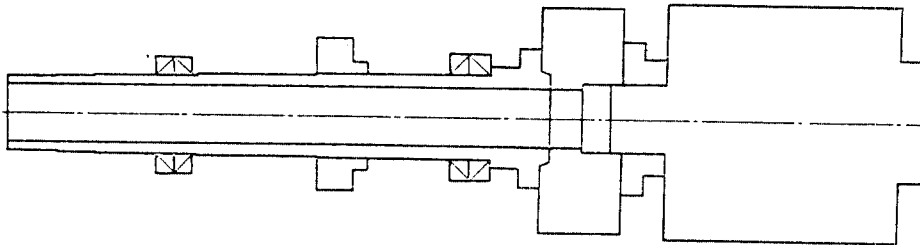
(a) Skelton diagram of lathe head stock with a work piece
